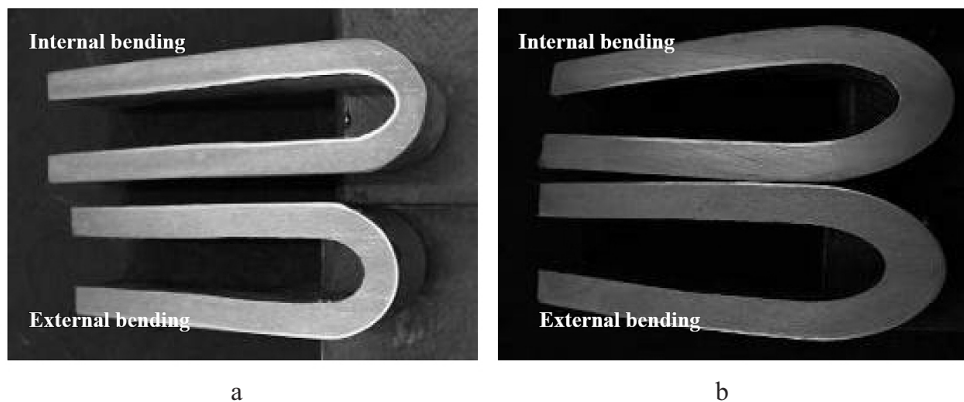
Bending specimens of 5 (a) and 8 mm (b) of stainless steel clad plate.
